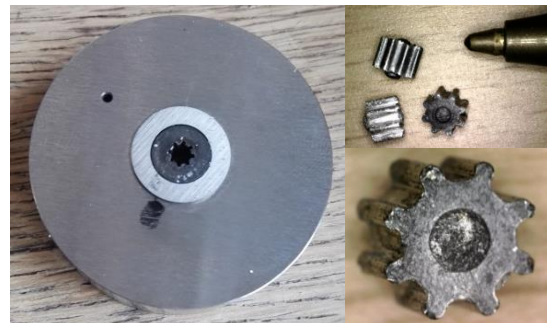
On the left, manufactured components in H13 steel. On the right, samples of sintered gears and a pen tip.
